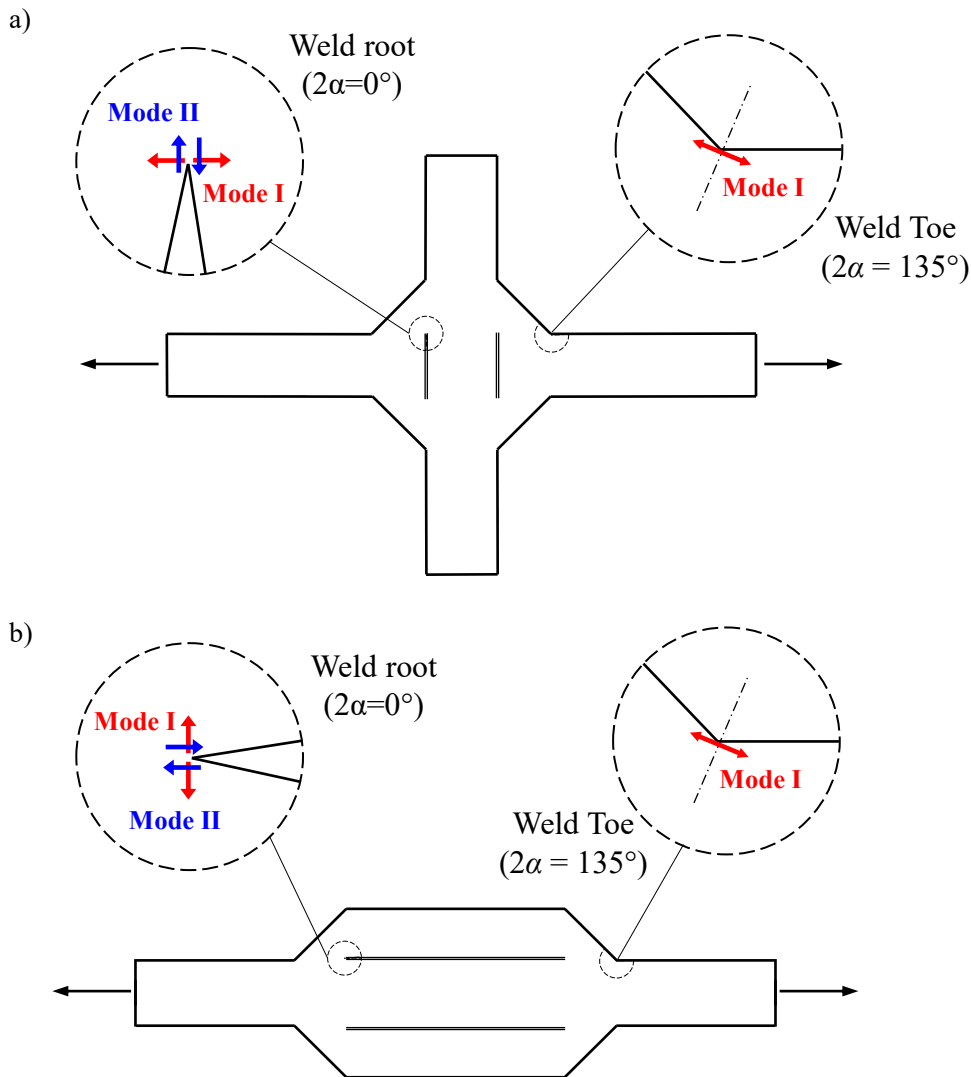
Example of welded details exhibiting mode I+II singular local stresses at the weld root ($2\alpha=0^\circ$) and pure mode I singular local stress at the weld toe ($2\alpha=135^\circ$, mode II is not singular at the weld toe). a) load-carrying fillet-welded cruciform joint and b) fillet-welded lap joint.
